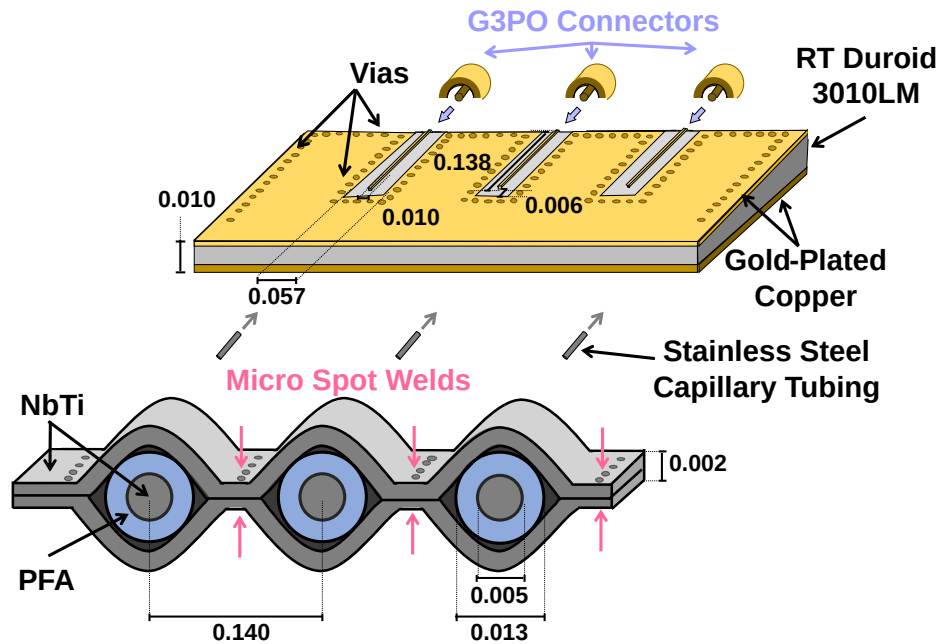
Exploded view of cable-end assembly with key dimensions shown in inches. Drawing is not to scale. From top/back to bottom/front: G3PO half-shell connectors are soldered to the transition board. The transition board features $50\ \Omega$ grounded coplanar waveguide structures with the upper ground planes connected in front to create capacitance between the upper ground planes and signal traces. The FLAX cable center conductors are crimped into stainless steel capillary tubes and soldered to the center traces. The FLAX ground shield is spot welded to the upper ground planes. The cable cross section shows the PFA (blue) insulated NbTi (grey) wire set in parabolic crimps made in the shared NbTi foil ground shield. The two sides of the shield are mechanically and electrically bonded with micro spot welds less than $\lambda/16 \simeq 2\ \text{mm}$ (at 8 GHz) apart that run in-between the traces down the length of the cable. Figure is modified from [145].
